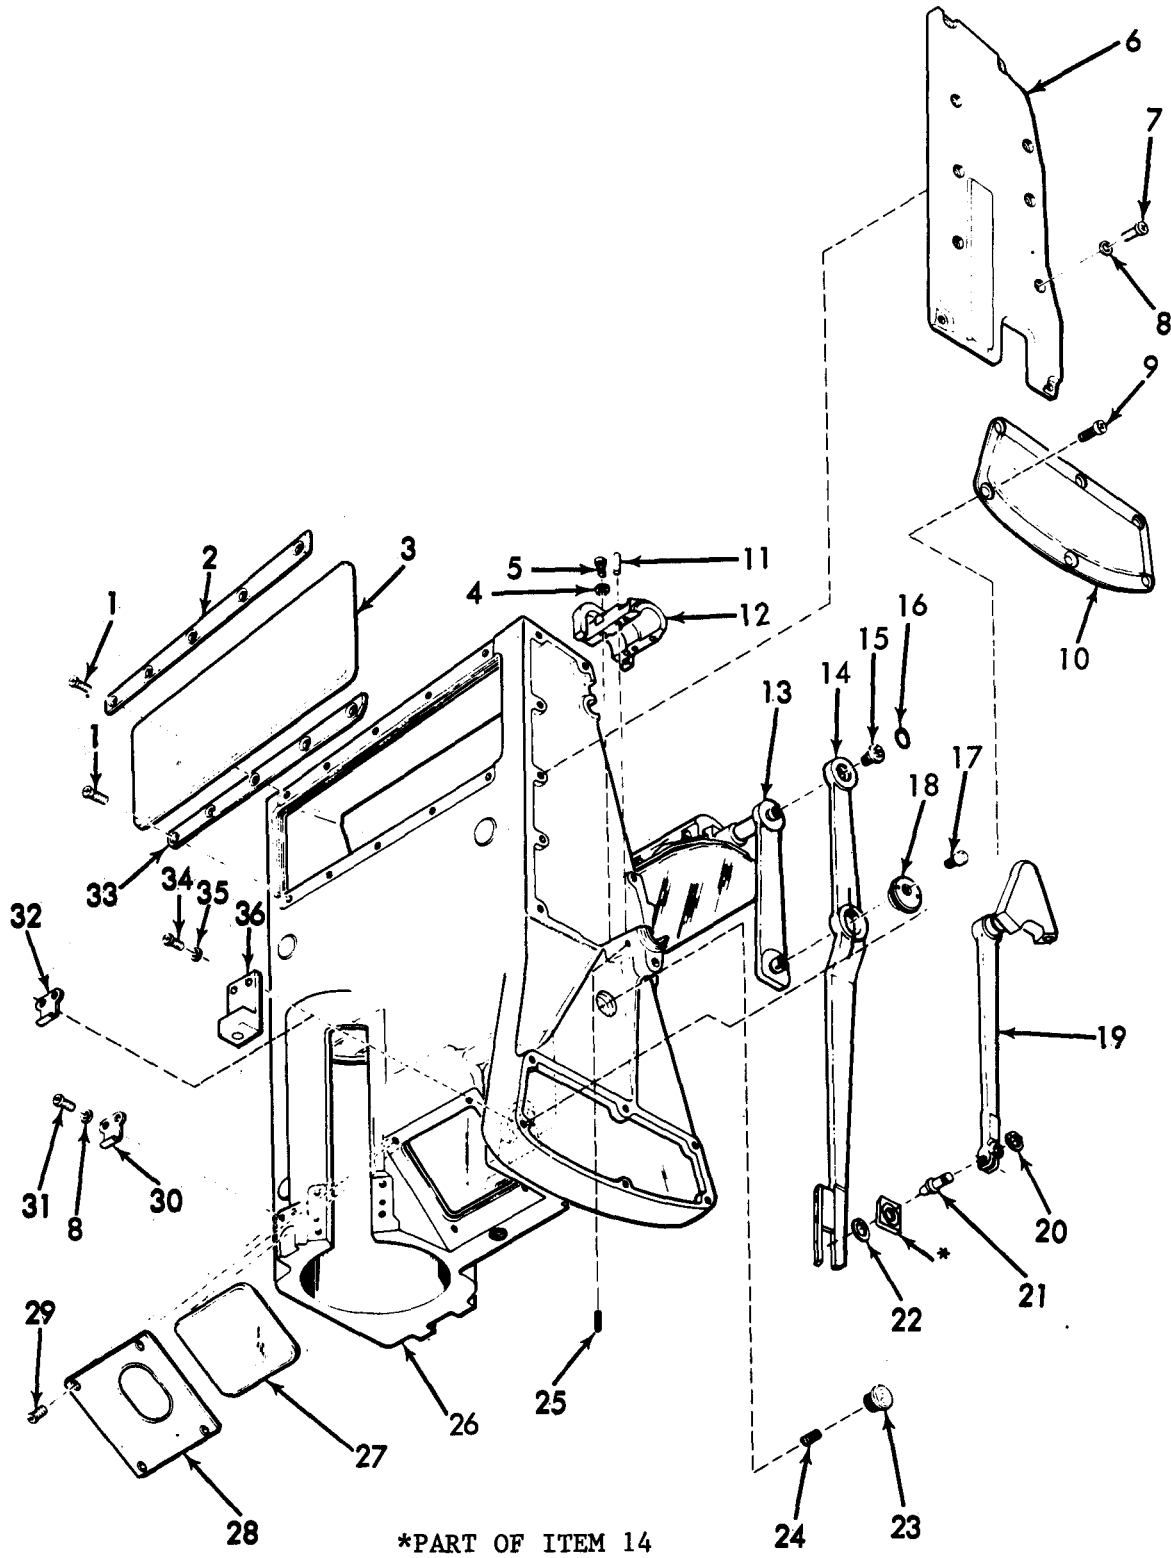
Head assembly 11727486, 10541990, and 11747439
